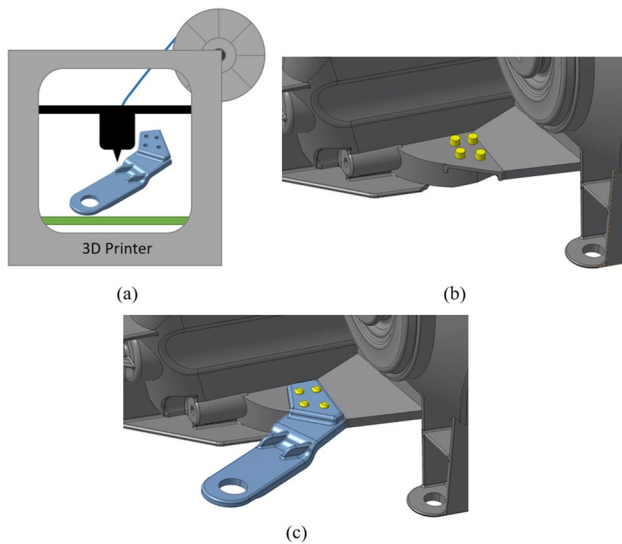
a 3D printing the replacement lug, b four stake posts 3D-printed on the damaged headlight assembly, and c 3D-printed spare lug staked onto the headlight
